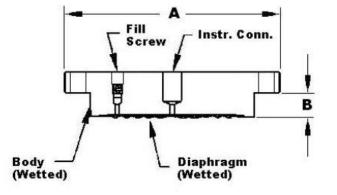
Seal Dimensions (Chemical TEE "Taylor Wedge" Seals
